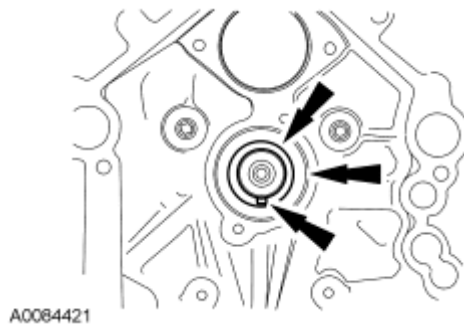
Locating Camshaft, Camshaft Spacer And Camshaft Key
